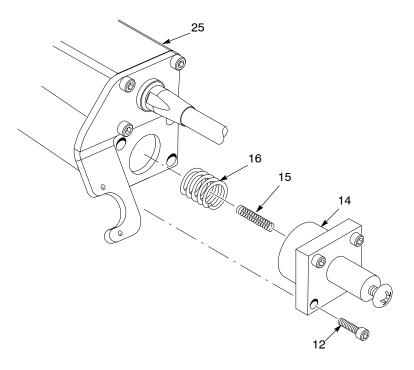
Fluid and Piston Return Compression Springs Replacement
